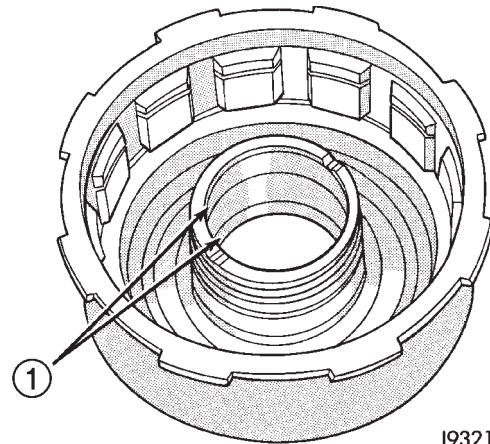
Front Clutch Piston Retainer Check Ball Location
